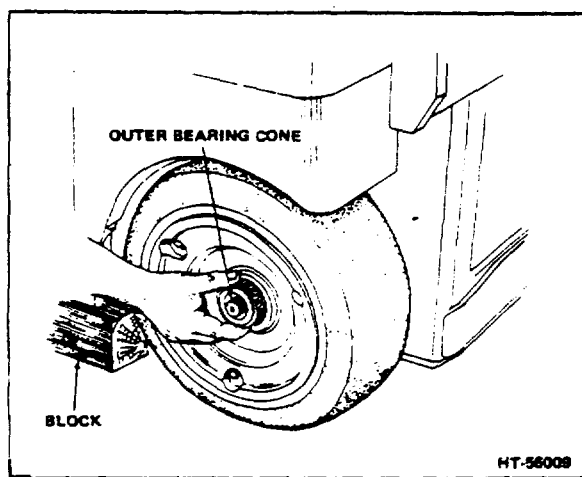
Remove Drive Wheel Outer Bearing Cone
